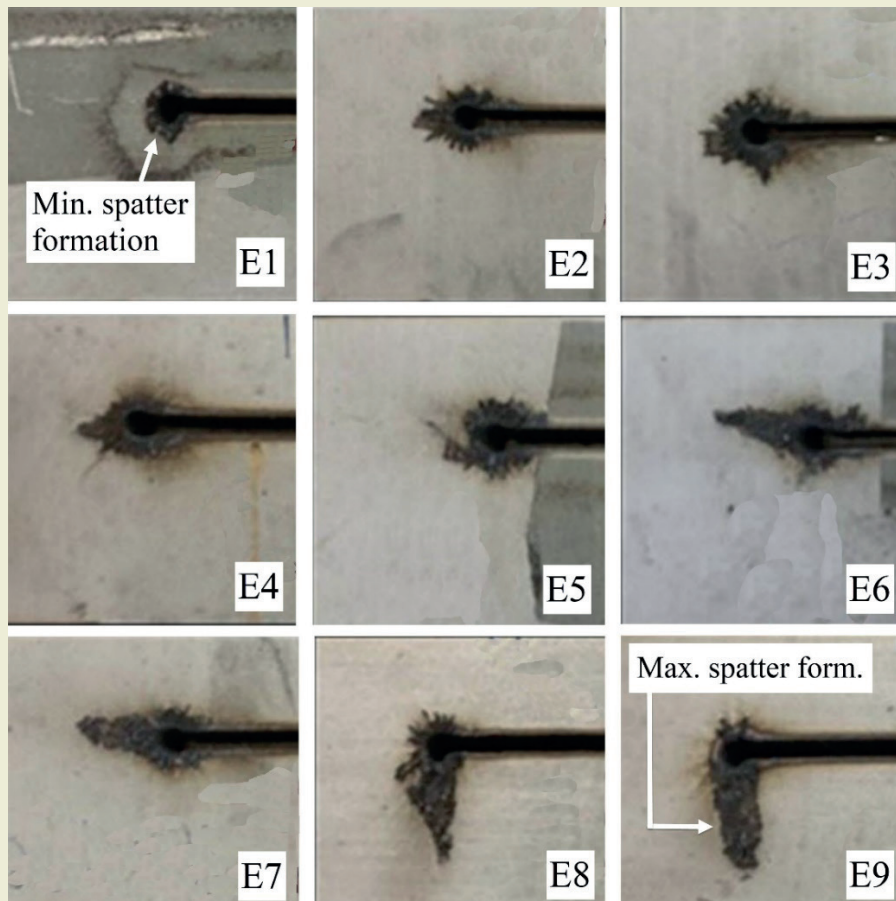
Top surface spatter formation after cutting on 8 mm thick plate
